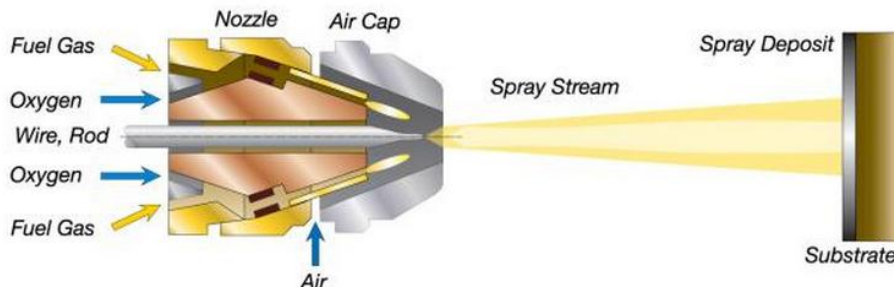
Wire/rod spray gun cross section (Courtesy of Sulzer company)
